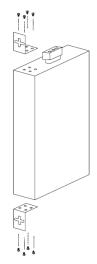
DIN-RAIL OR WALL/PANEL MOUNTING
